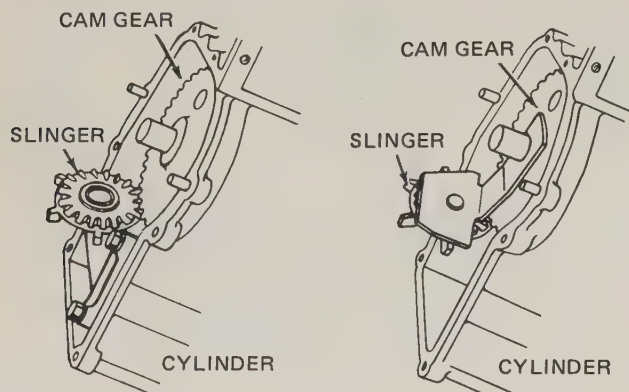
Oil slinger is rotated by the camshaft gear.
